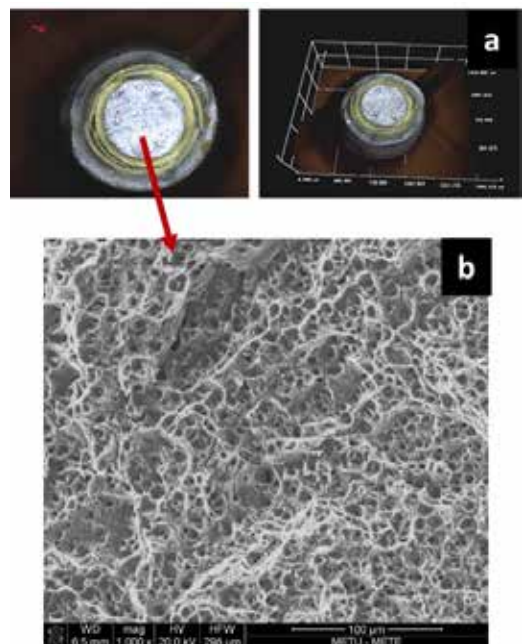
a. Optical microscopy image of fractured rivet surface b. Scanning electron microscopy image of fractured rivet surface
